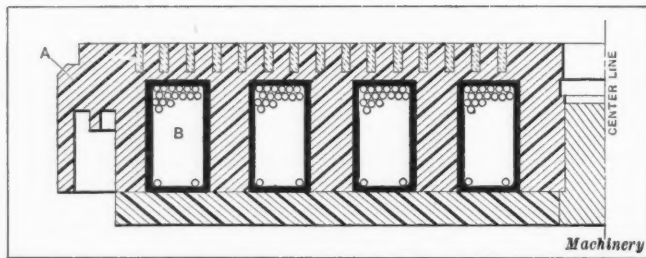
Cross-sectional View taken on Radial Line from Center, showing Construction of Blanchard Magnetic Chuck
